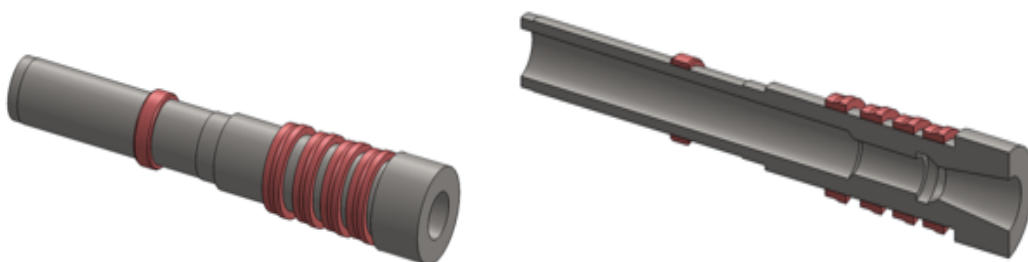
SolidWorks 3D model of the main shaft assembly of Fig. 4.13
